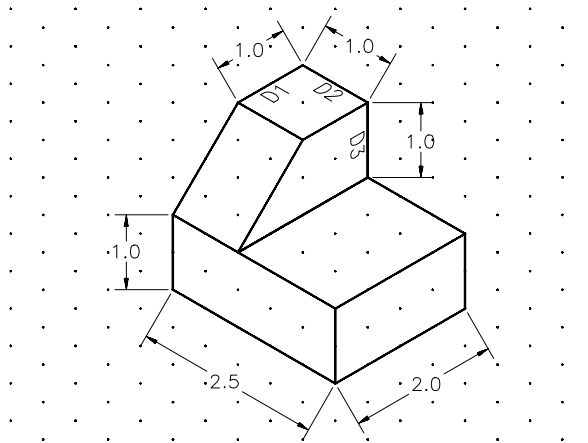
Dimensioning an isometric drawing, before obliquing
